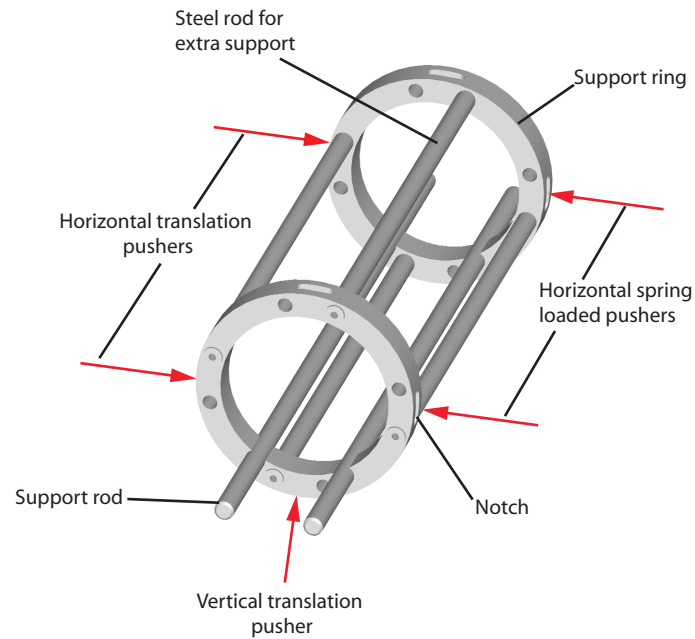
The cradle that supports and positions the decelerator inside the vacuum chamber.
